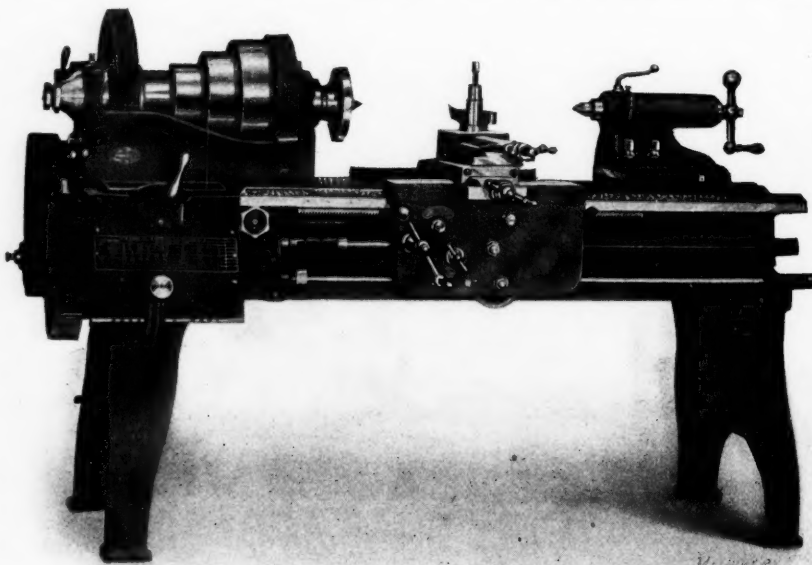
Reed Lathe provided with Quick-change Gear Mechanism
